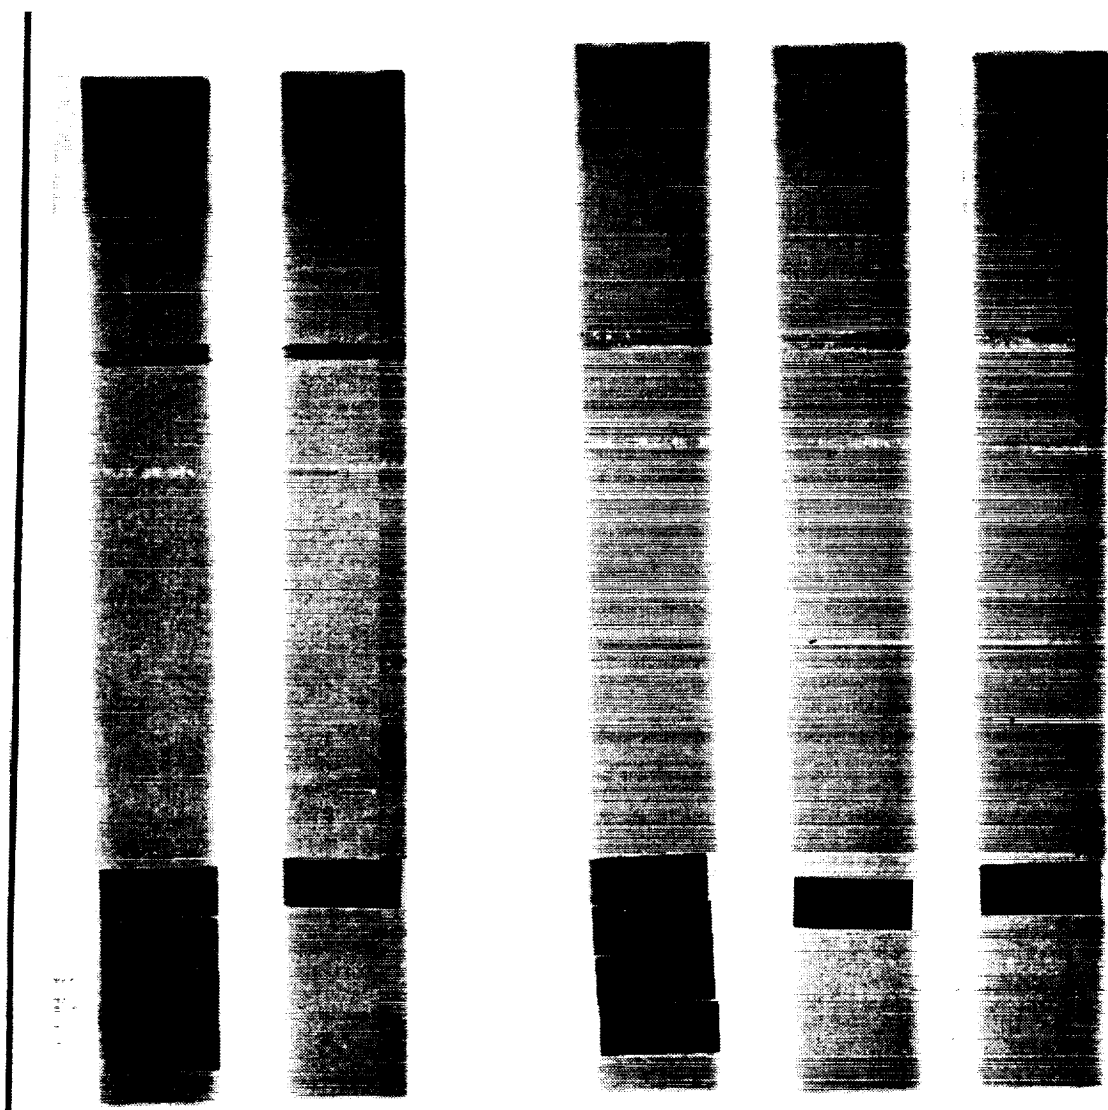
Contact Prints of Radiographs Showing Porosity in 0.050 in. (1.3 mm) Thick 8090-T6 to 0.120 in. (3.0 mm) Thick 2090-T83 weld with 0.001 in. (0.02 mm) Removed by Chemical Milling.
